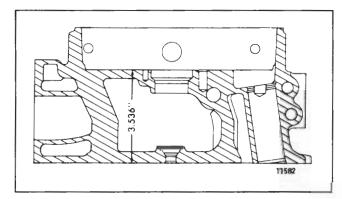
· Minimum Distance Between Top and Bottom Faces of Cylinder Head
